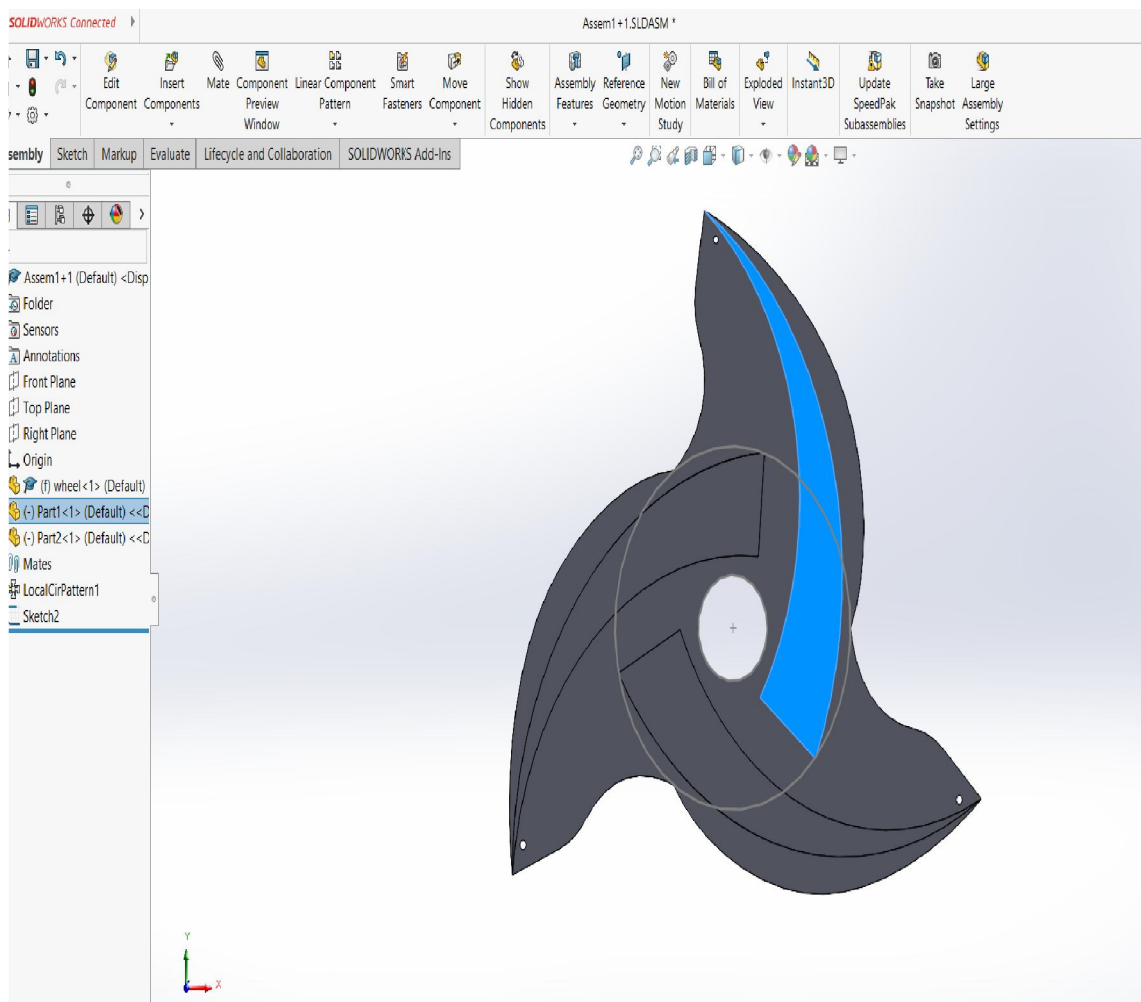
Wheel assembly position-2nd to adjust the movement (wheel 1 case 1)
